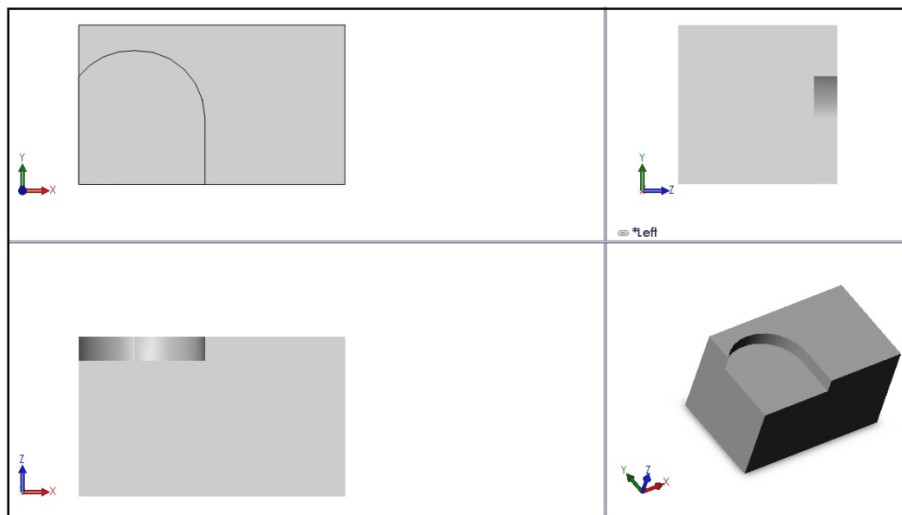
Output for tool path in Annexure 1 for flat end mill cutter.
